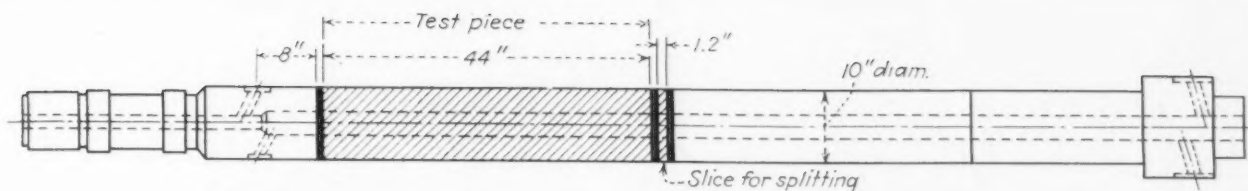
Scheme of test pieces for measuring residual stresses in a piston rod.
